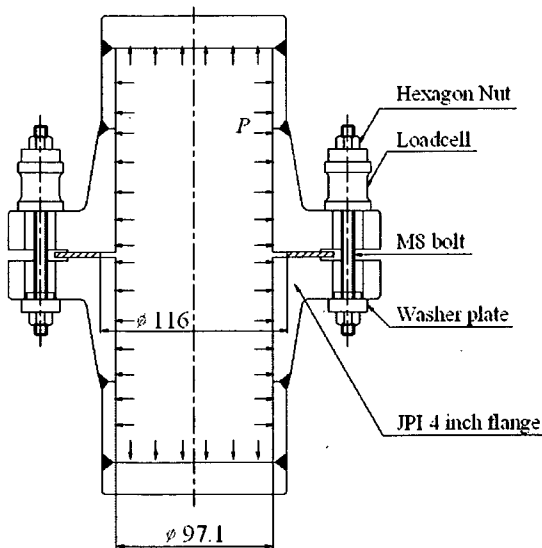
Pipe flanged joint with joint seat gasket subjected to internal pressure.
